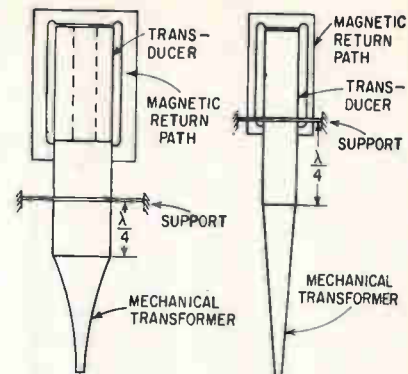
Conventional mounting at left or mounting for quarter wavelength transducer at right can be used
